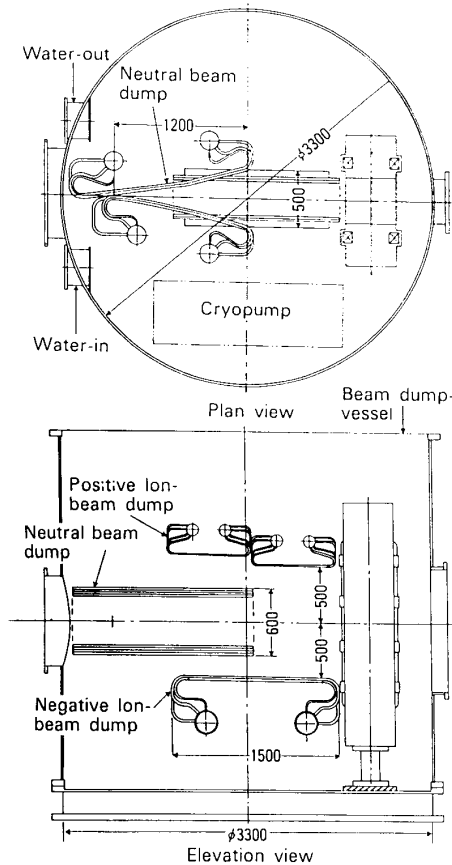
Neutral beam dump (upper plan view) and the ion beam dumps (lower elevation view).
